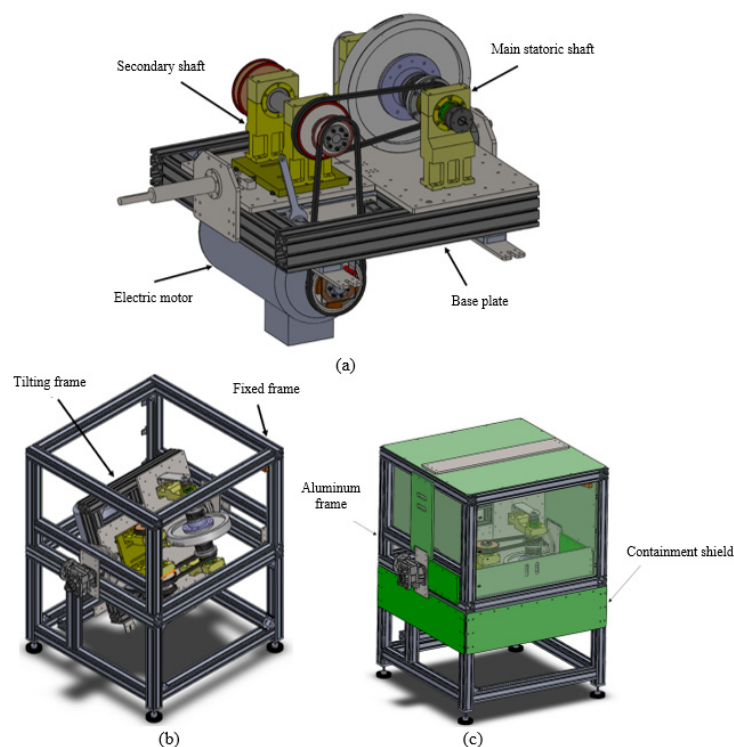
Test rig CAD model overview: (a) tilting base with motor, secondary shaft and main axis; (b) frame definition; and (c) aluminum frame with steel armor.
